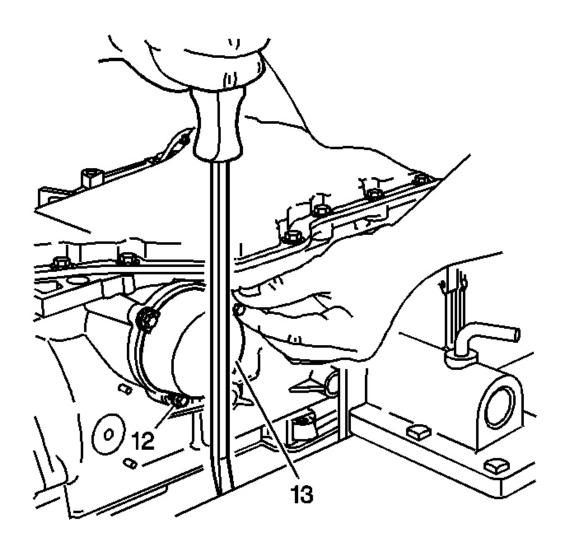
Compressing Forward Band Servo Assembly Courtesy of GENERAL MOTORS CORP.
